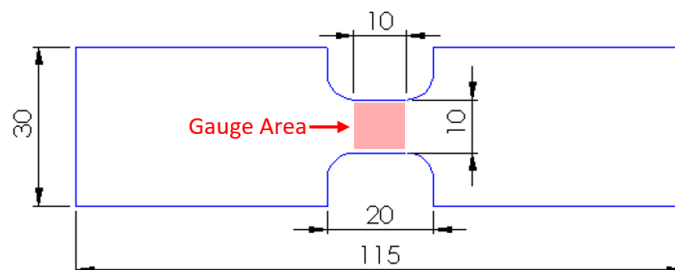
Hot tensile specimen geometry. All dimensions are in mm.
